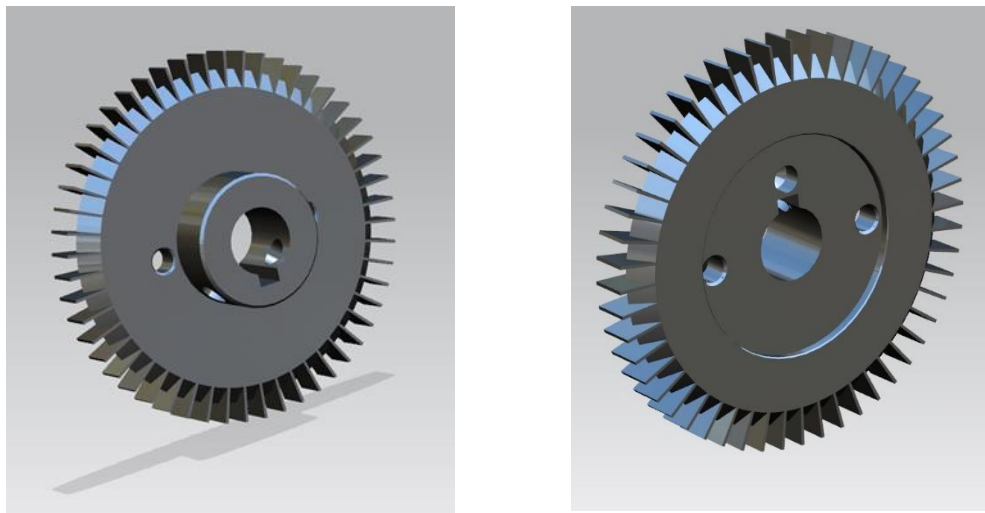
The three-dimensional model of impeller system - MOMB-DAF-1
